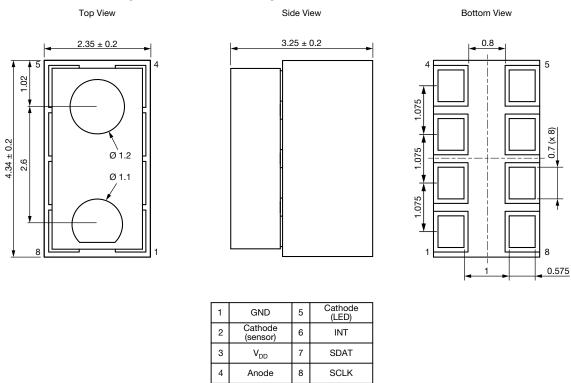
VCNL4040M3OE-H3 Package Dimensions
